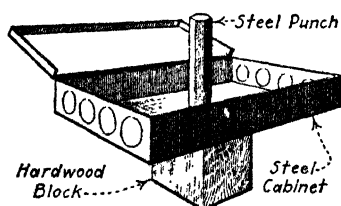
Punching hole in a steel cabinet with a steel punch.
